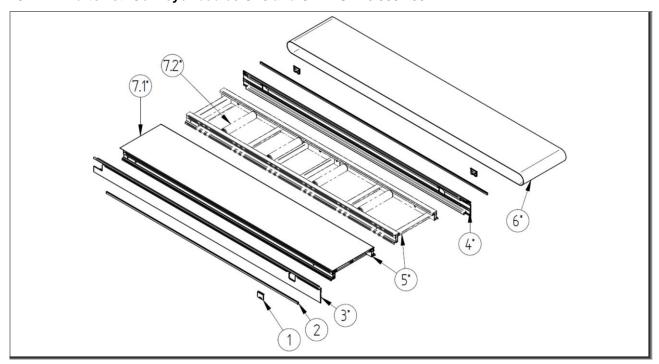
Parts list: Conveyor bodies GL0 and GL7 - U.116.0002.00
